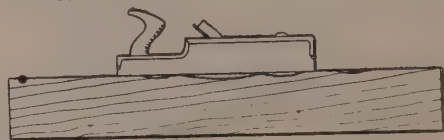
SHOWING HOW A LONG PLANE SPANS THE HOLLOW PORTIONS OF THE WOOD WHEN PLANING.
